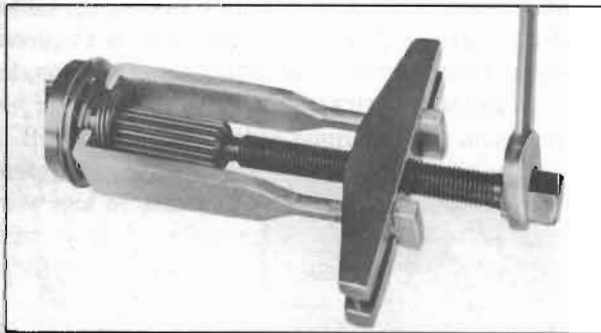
Removing Worm Gear with Puller J 1134-H
